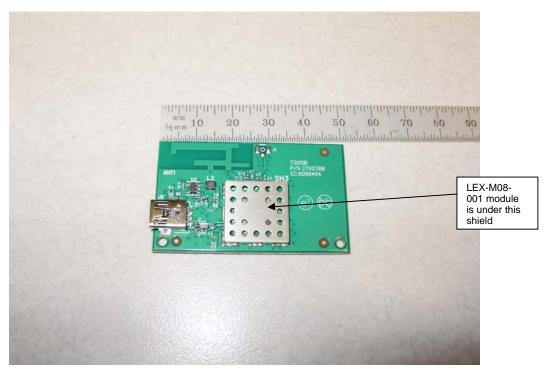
showing LEX-M08-001 module on host PCB under a shield.
